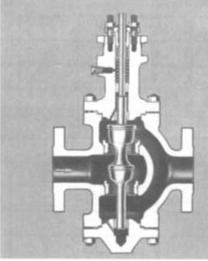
Type 657-A control valve with double port, top and bottom guided V-pup valve plug.
